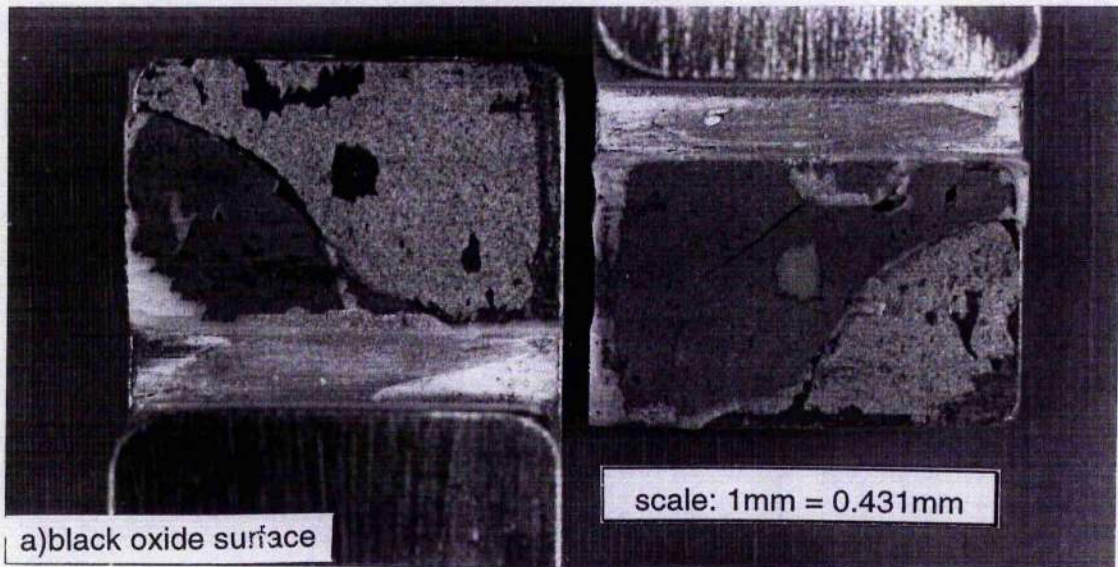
Failure surface showing poor adhesion of an Araldite 2007 bonded steel lap shear joint
